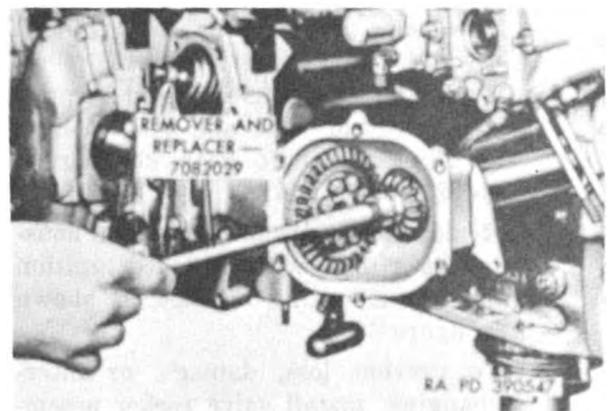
Removing or installing camshaft drive shaft oil transfer outer plug.
